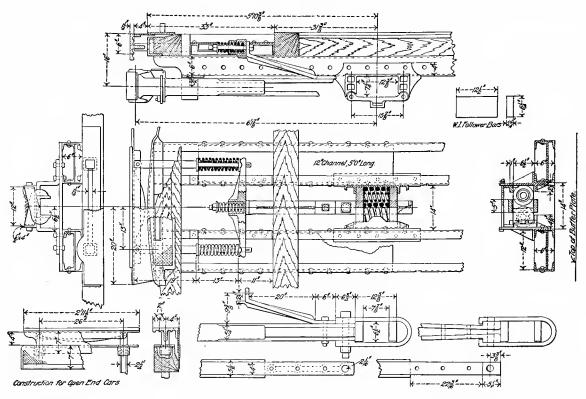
National Steel Flatform and Buffer with Hinson Twin Spring Draft Gear, for Vestibuled and Open End Cars. National Car Coupler Company.
